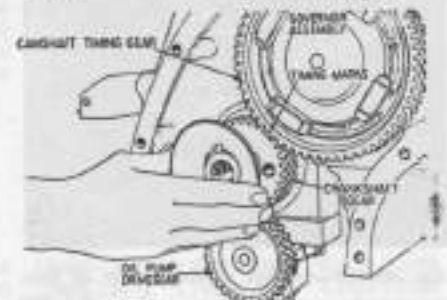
Massey-Harris timing gear marks and oil pump drive gear.
